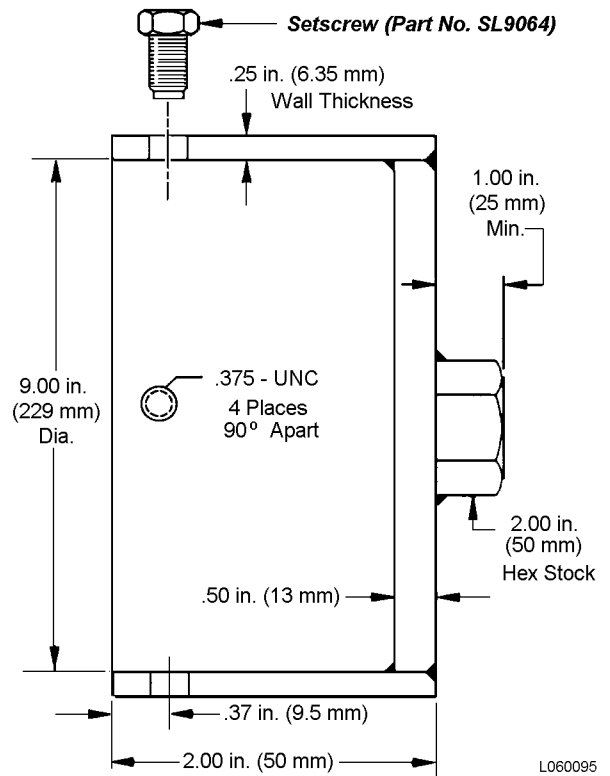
GLAND REMOVAL TOOL (Fabricate Locally)
